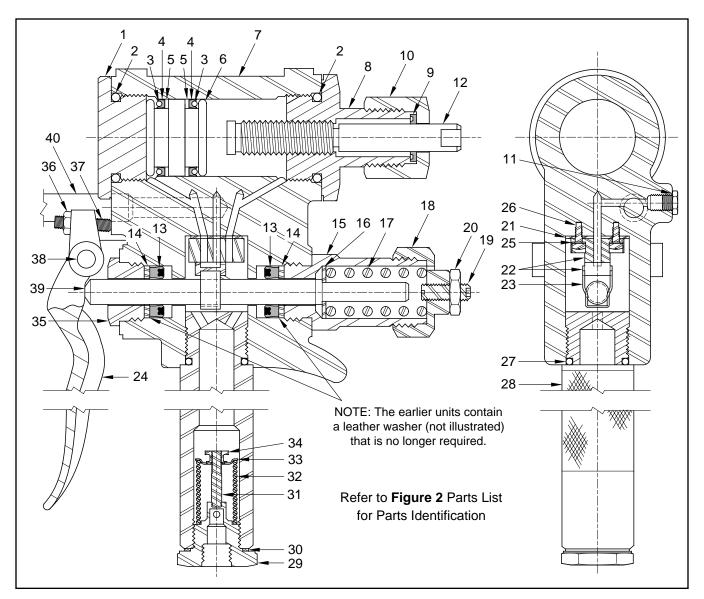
High-Pressure Measuring Control Valve Model 7716-D1 - Section View
